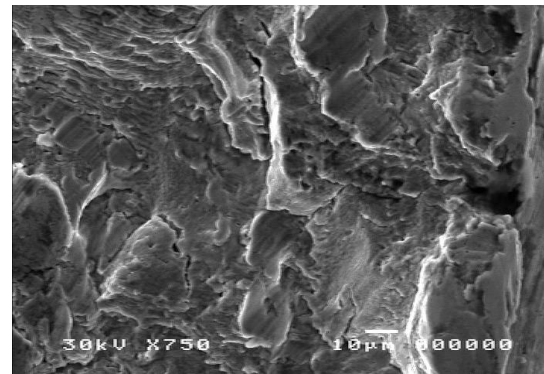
A SEM image of the fuel tube fracture surface at the crack termination zone.
